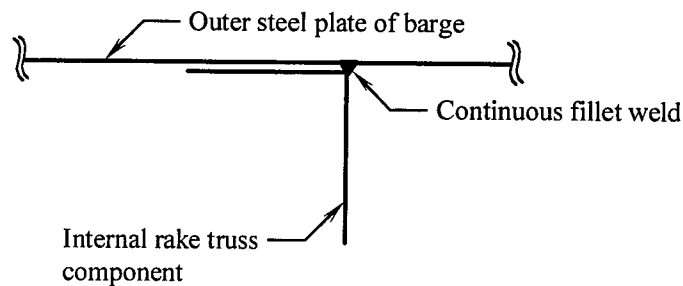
Typical welding detail for barge bow internal sections
